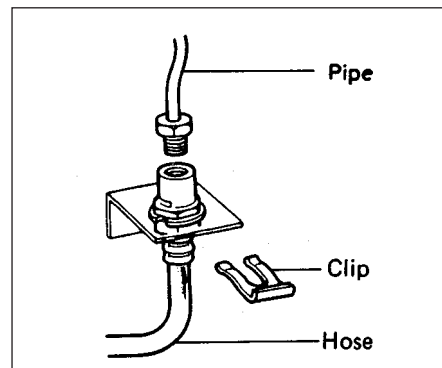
Typical hydraulic hose connection (Sec 11)
